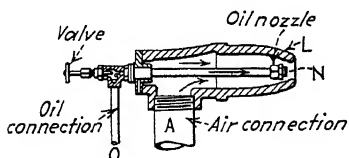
Industrial oil burner with pressure-type nozzle.
